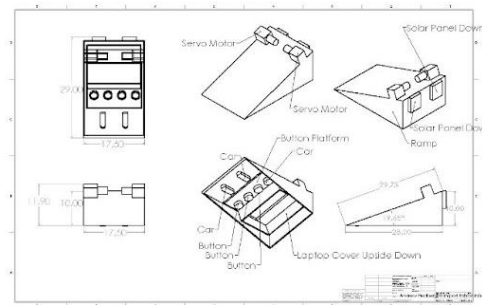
Transport Mode CAD Drawing by Andrew Hedberg
